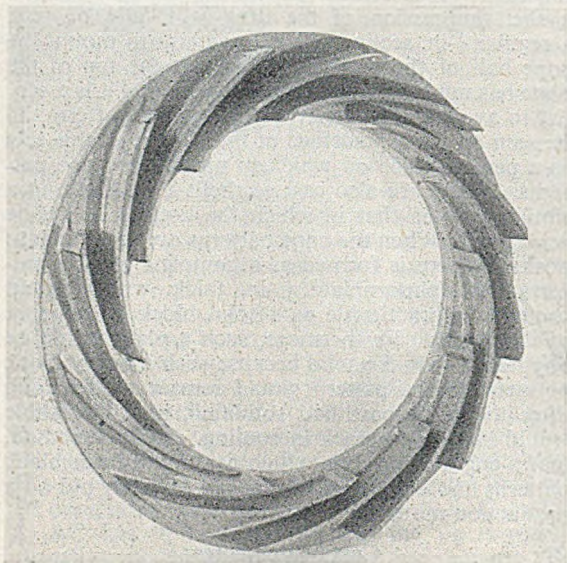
Cast-iron Pattern for an Impeller Casting, approximately 20 in. dia.
